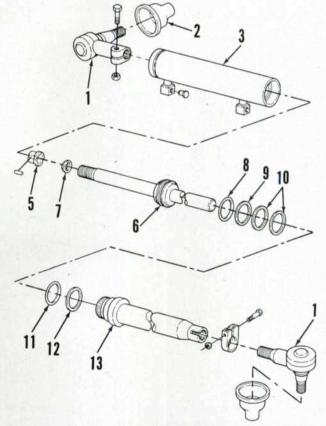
Exploded view of power steering cylinder used on early production models with external cylinder.
